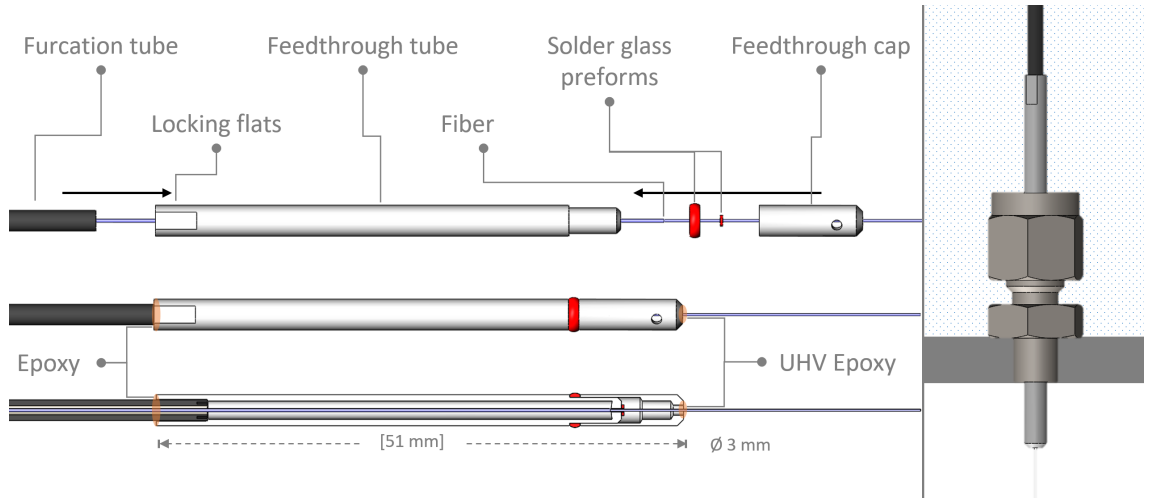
This shows a breakdown of the fiber feedthrough structure: an expanded view, the completed assembly, and a cut through once assembled. On the right is shown a completed feed through fastened into a swagelok fitting.
